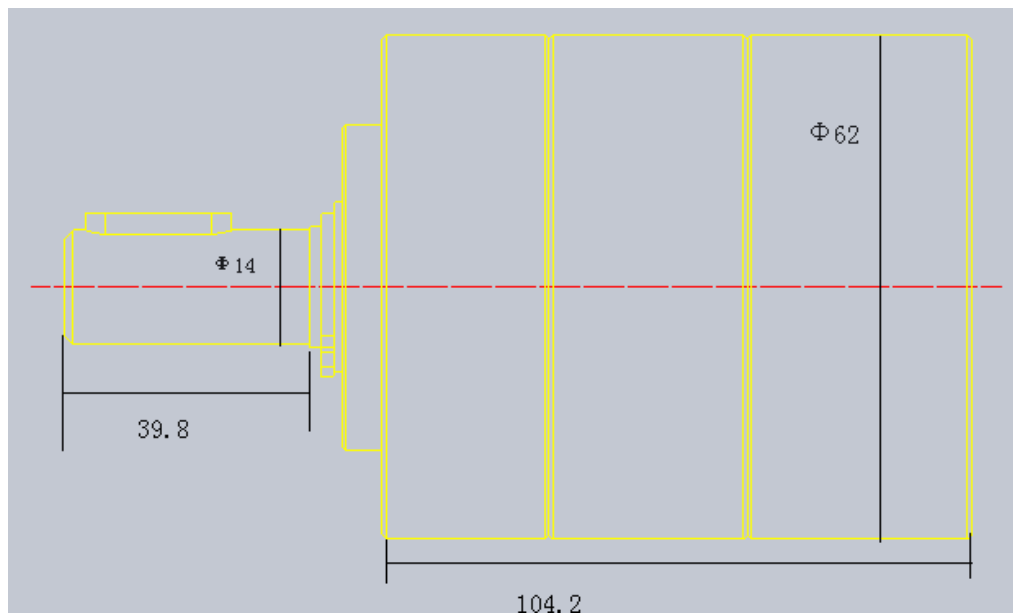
CAD presentation of the Maxon planetary gearhead GP 62.
